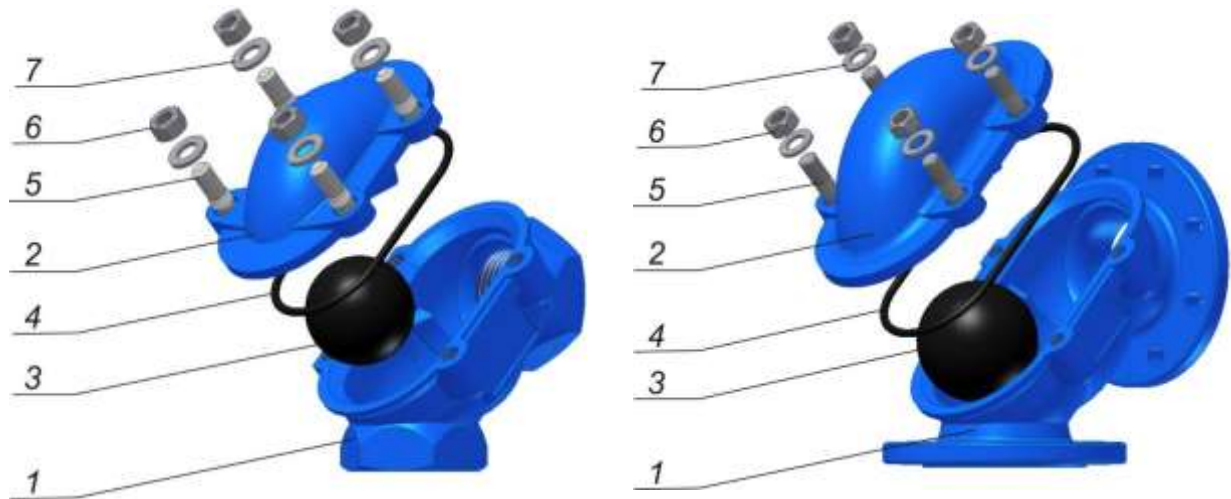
List of the parts of ESK 01 and ESK 11 type valves
